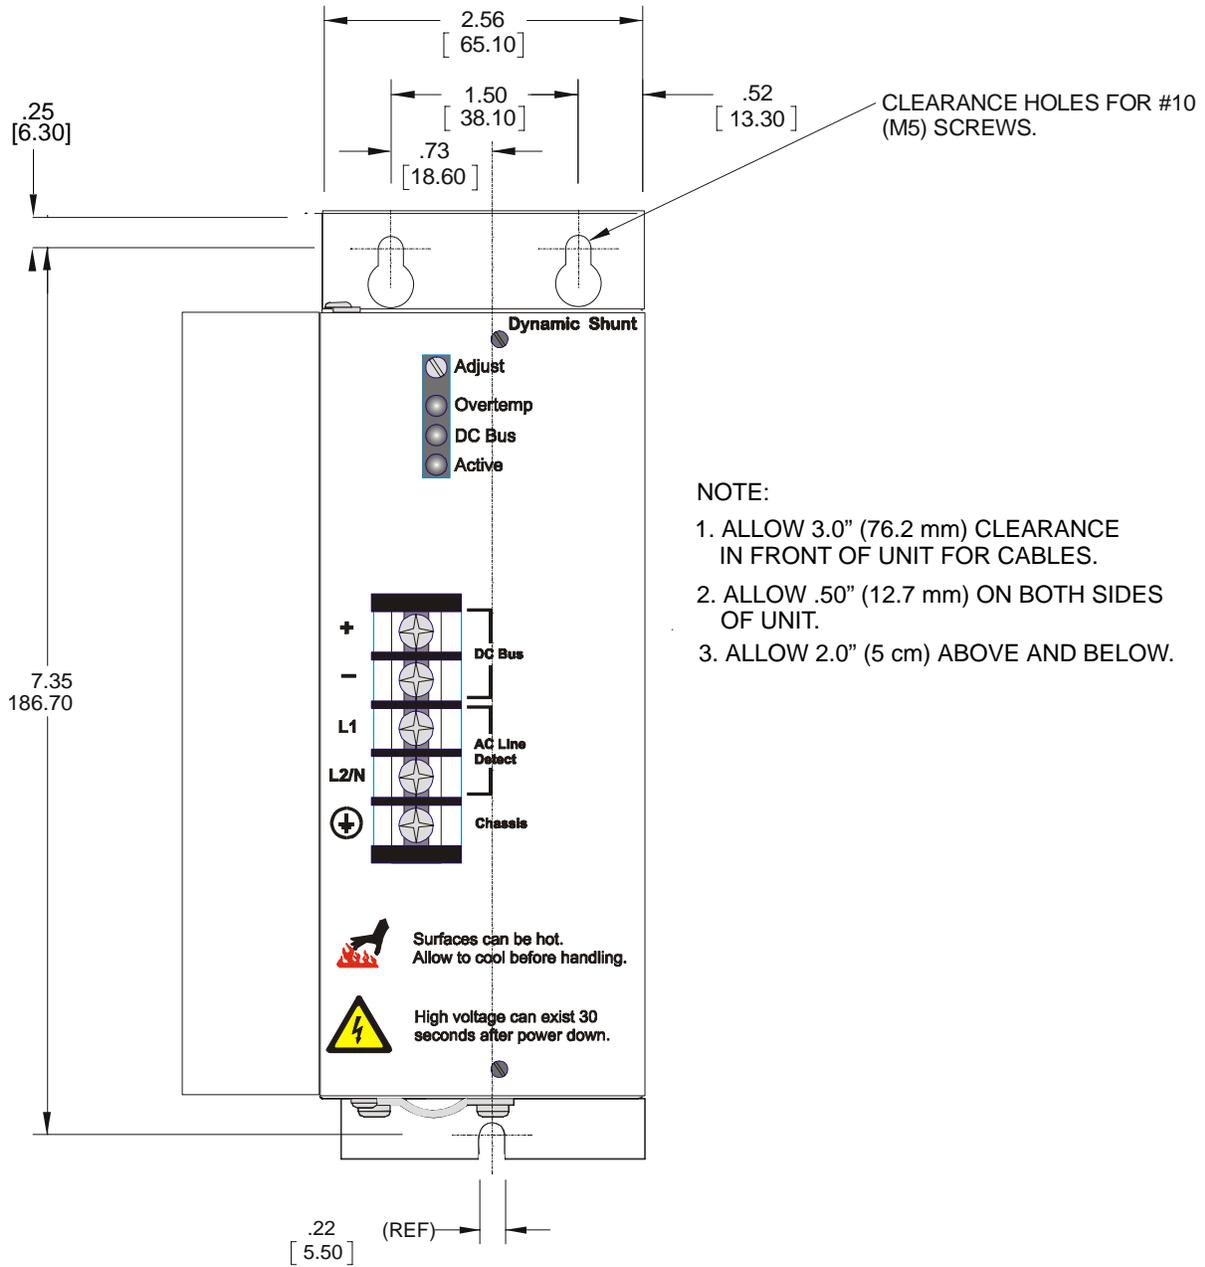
Mounting Dimensions for 460V External Shunt (P/N M.1302.7048)
